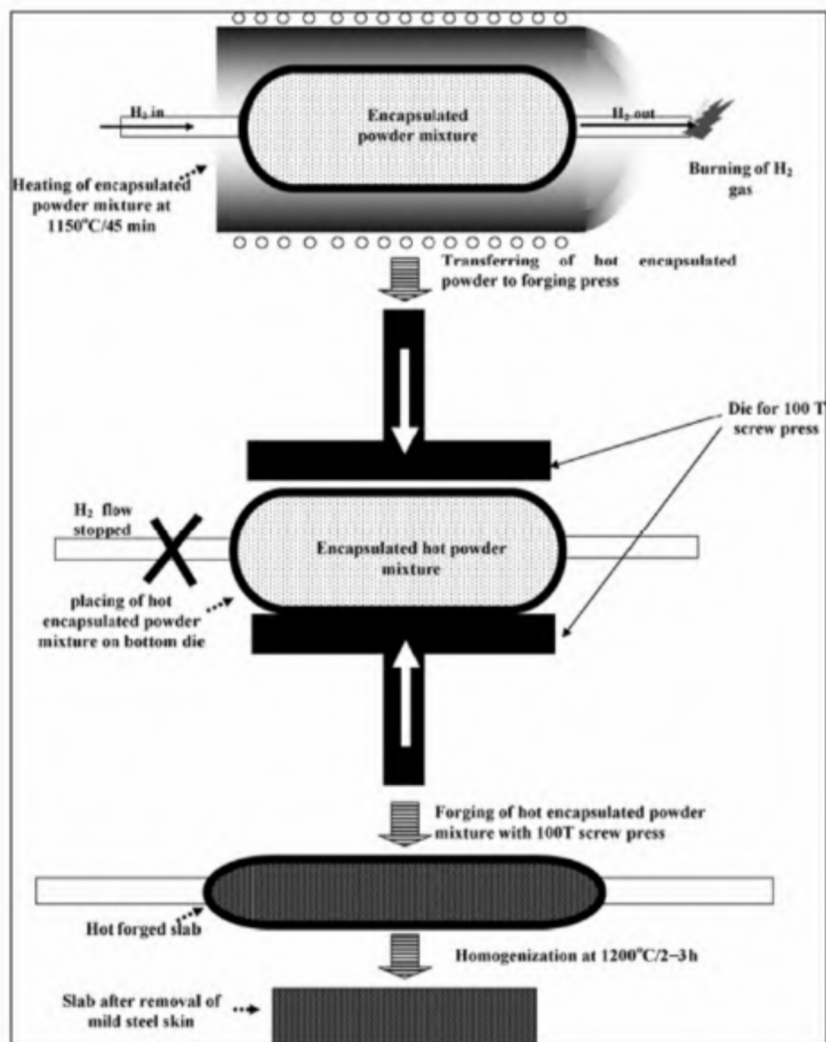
Schematic diagram illustrating the production of slab by hot forging of encapsulated powder mixture.
